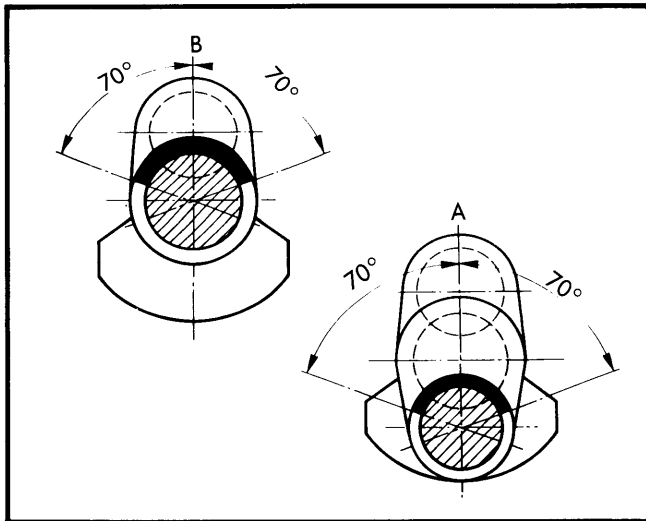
Crankshaft MUST Maintain Roll Hardened Surfaces as Shown
